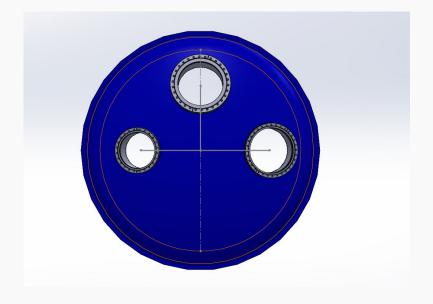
toripsherical SolidWorks end cap model with 3 vacuum ports
